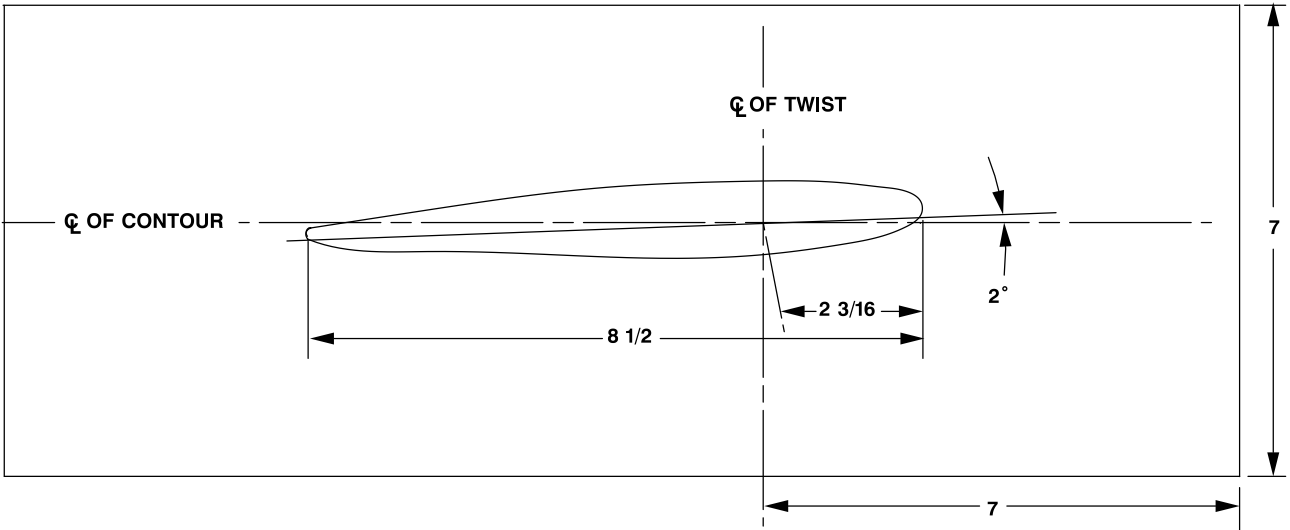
Main Rotor Blade Container (Sheet 4 of 6)
